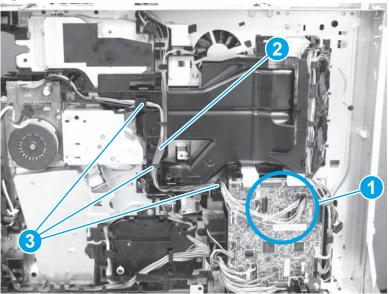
Pull one cable and the FFC through the formatter cage
